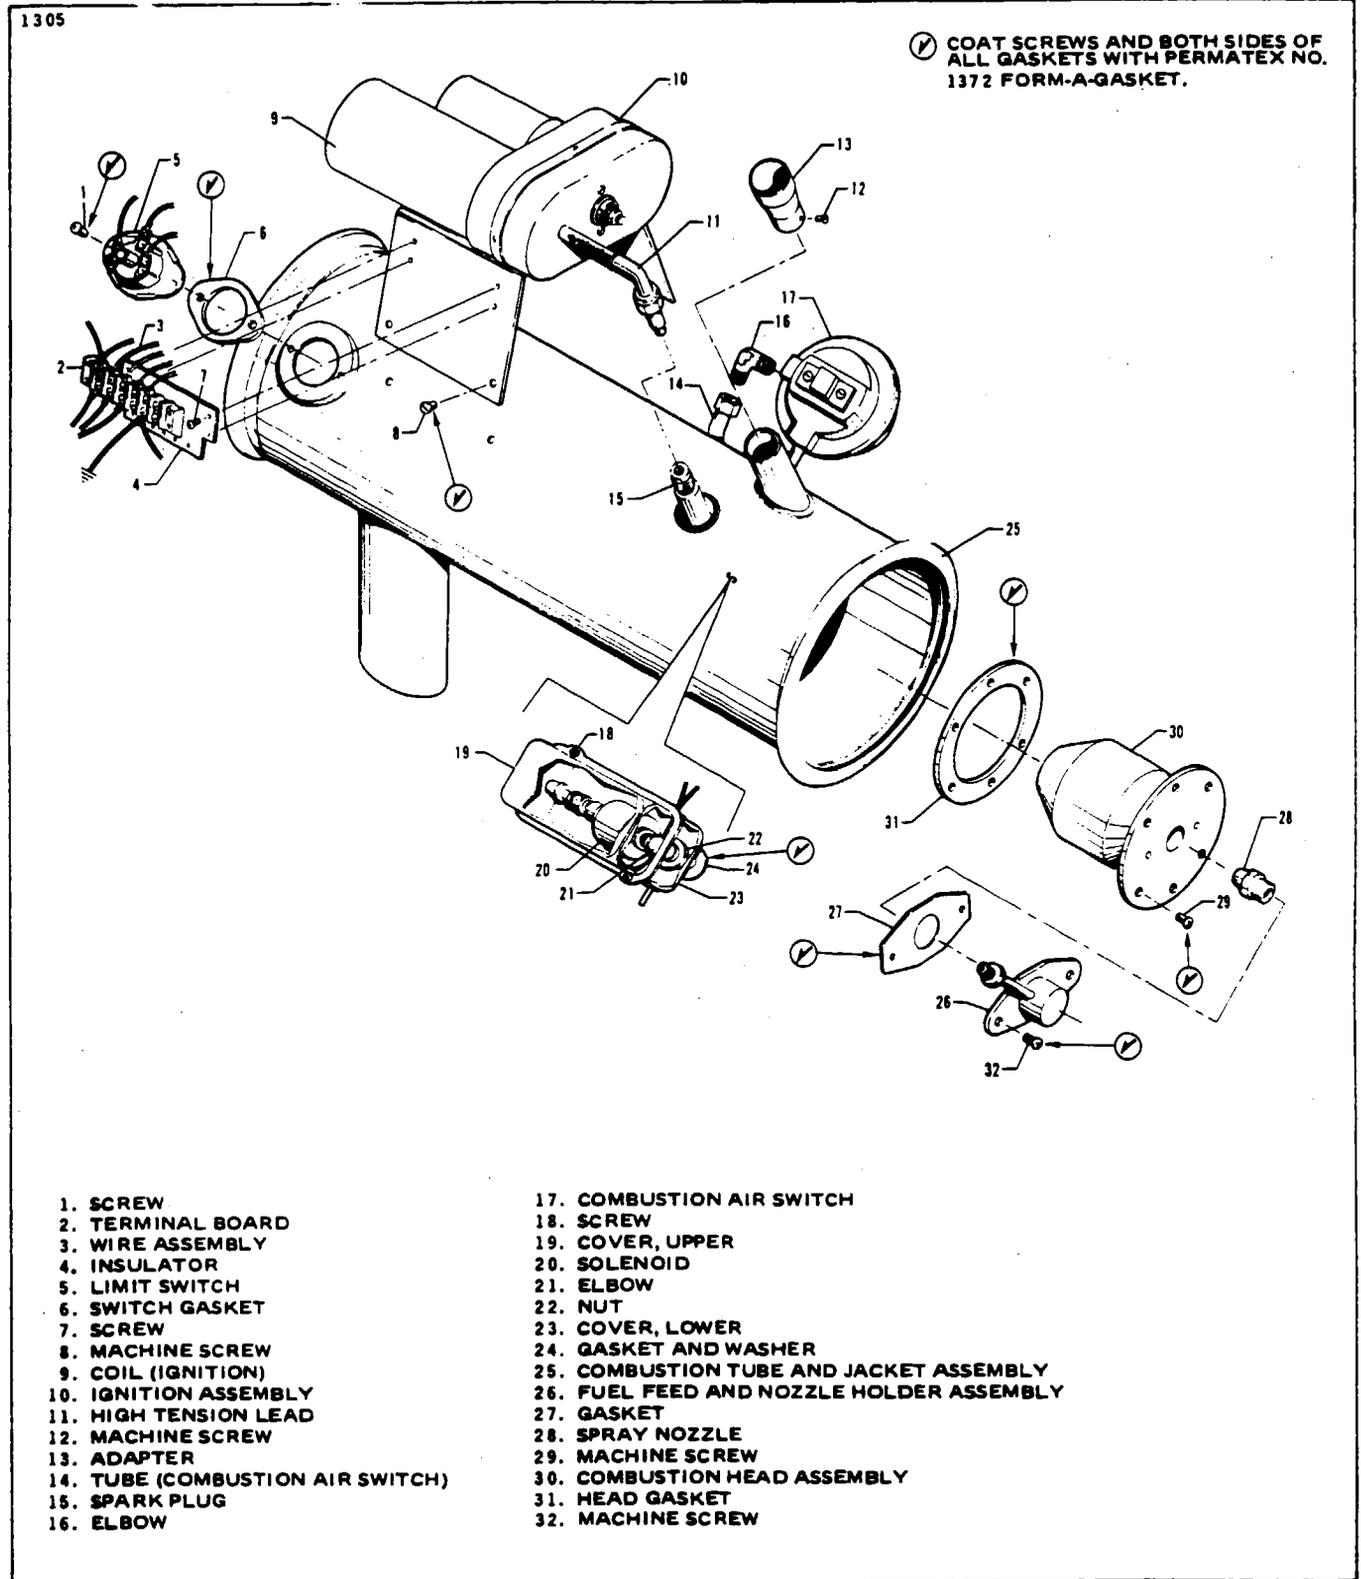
Heater Assembly (47D65-1) Exploded View
